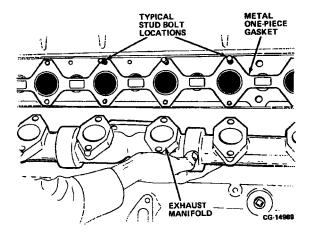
Exhaust Manifold Removal (Three-Piece Manifold Shown)
